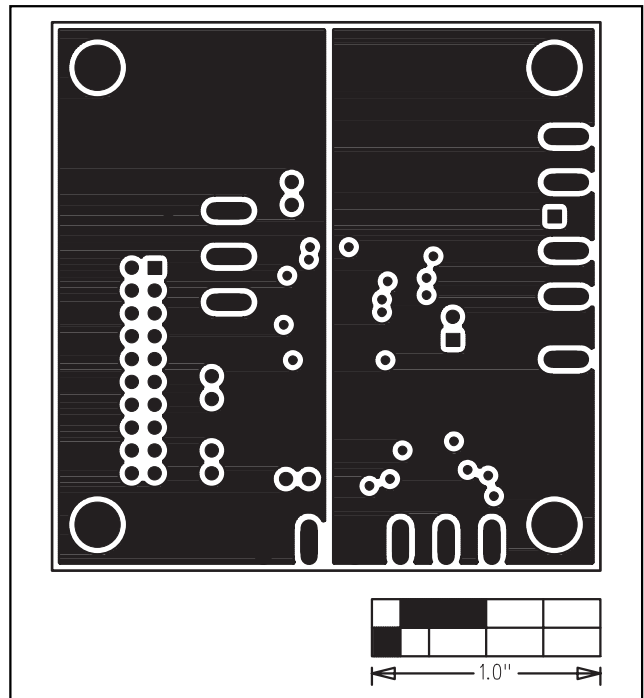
MAX1169 EV Kit PC Board Layout—Inner Layer 3 (VDD)
